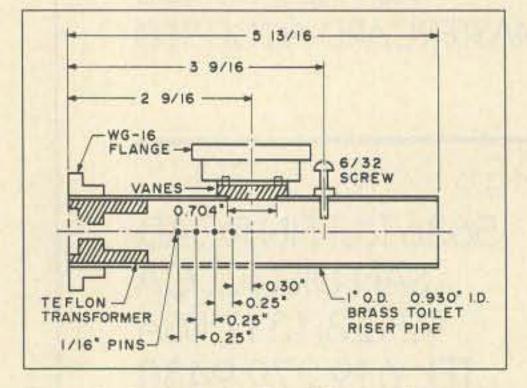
Cut-away profile of the circular waveguide, with the Teflon™ piece inserted.
